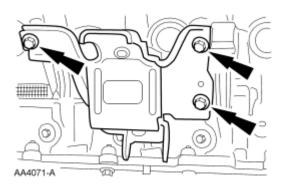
Engine Mount Bolts Courtesy of FORD MOTOR CO.
